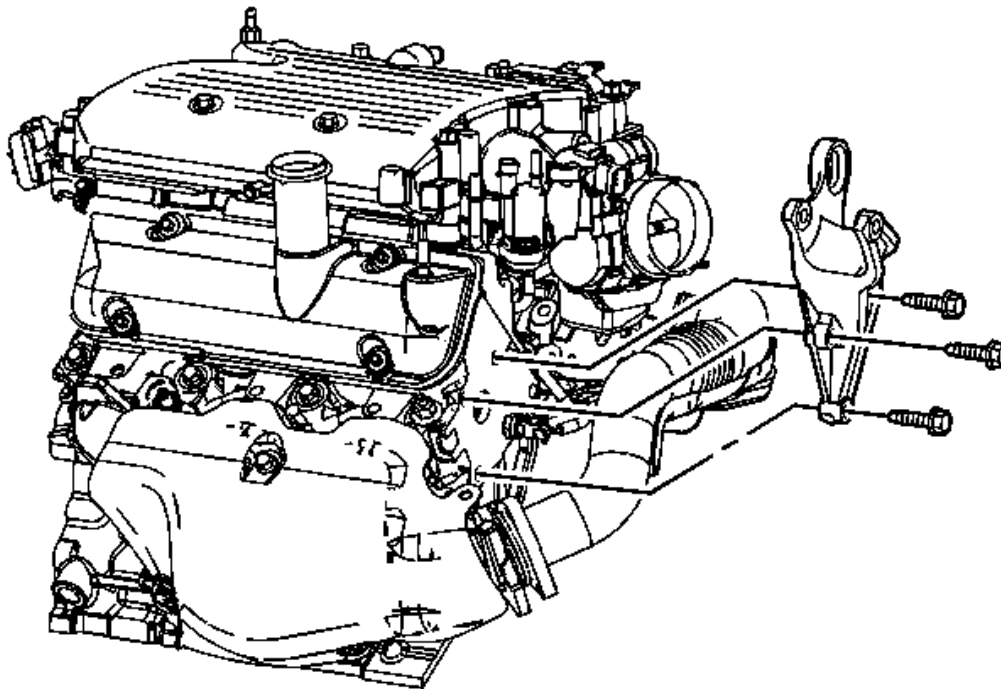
View Of Engine Mount Strut Bracket & Cylinder Head
